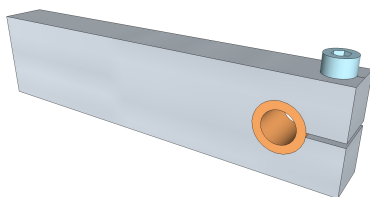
3D visualization of the movable grate housing equipped with bushing
